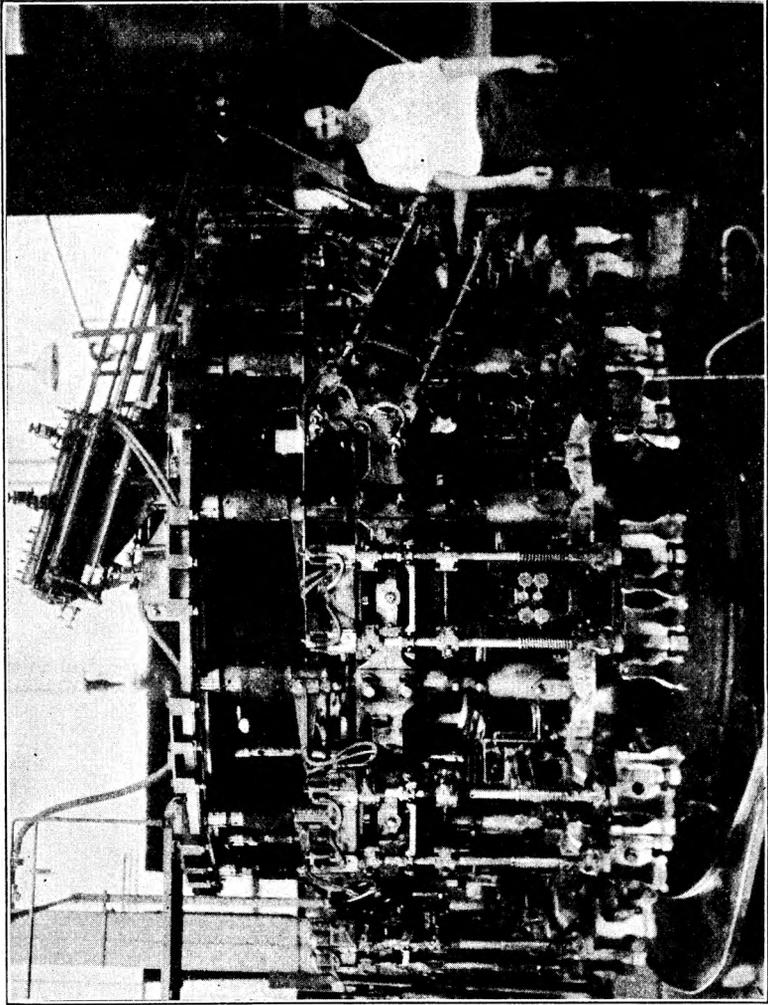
WESTLAKE AUTOMATIC MACHINE (NEW TYPE)
